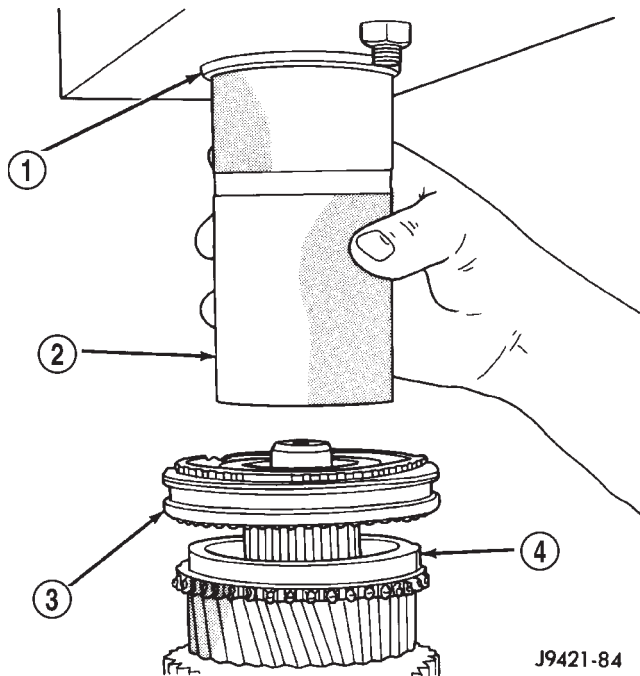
Pressing 3-4 Synchro Assembly On Output Shaft
